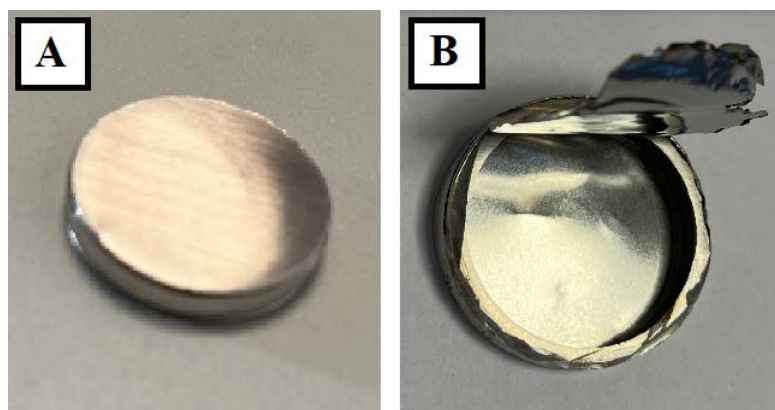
Welded Nb capsule (A) and opened capsule (B).
